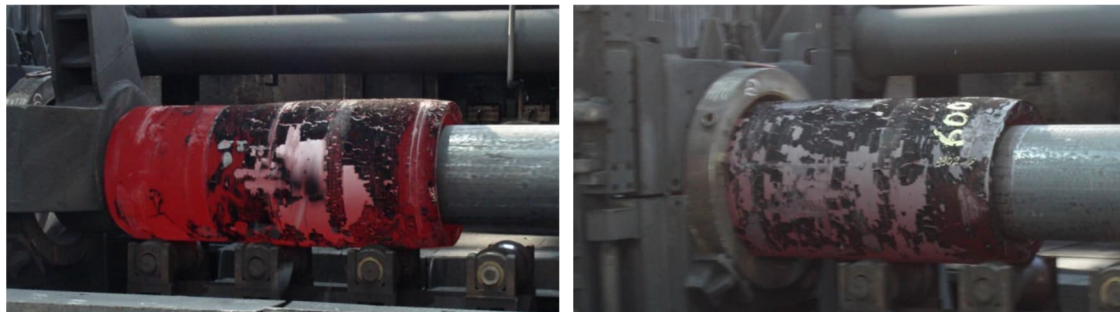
The left picture shows the expanding of the tube by pressing the tube with the mandrel against a steel plate, and the right picture shows the drawing pass (Nolvi, 2009).
